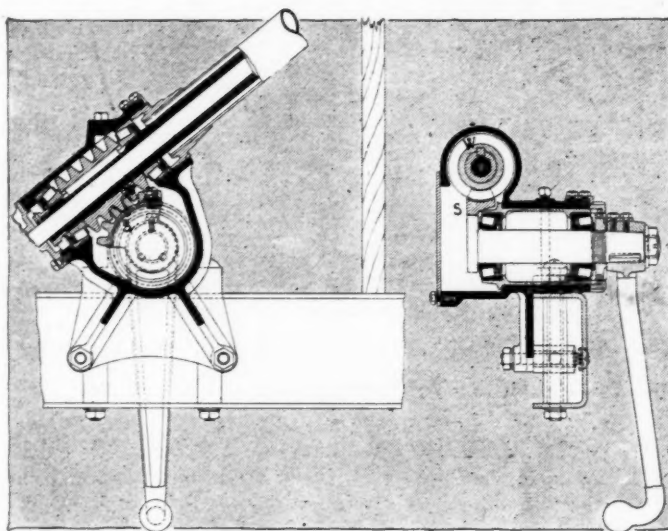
Transverse and longitudinal sections through Stoddard steering gear
